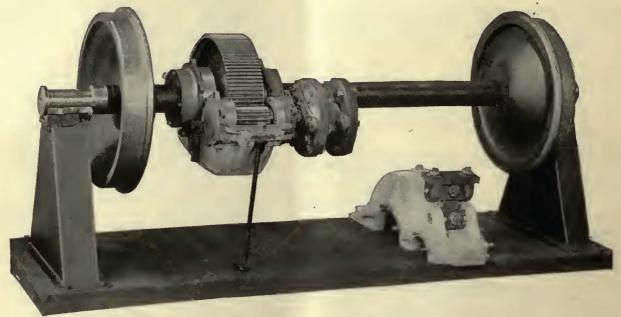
Axle Unit, Coupling and Hanger (top housing removed)
